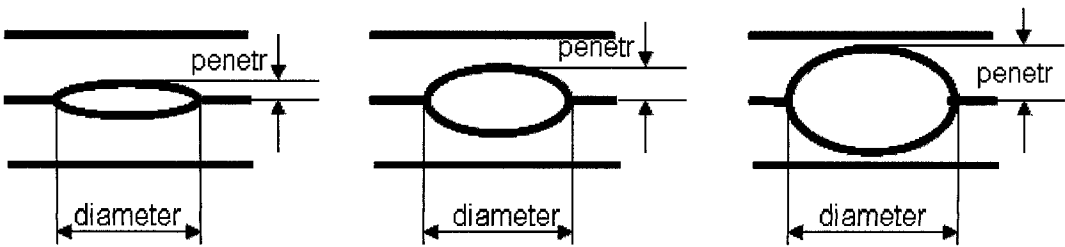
Schematic view of possible combinations of weld diameter and penetration level.
